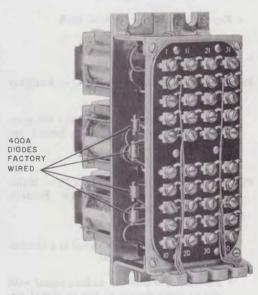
227A (MD) and 227B KTU (Rear View)
